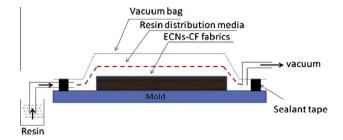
Schematic representation showing the composite-manufacturing technique of vacuum assisted resin transfer molding (VARTM).
